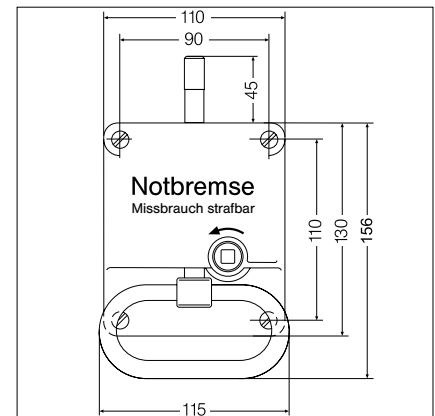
Emergency brake switch type series Kiepe NBS 200 for socket spanner with locking for window breaking hammer
